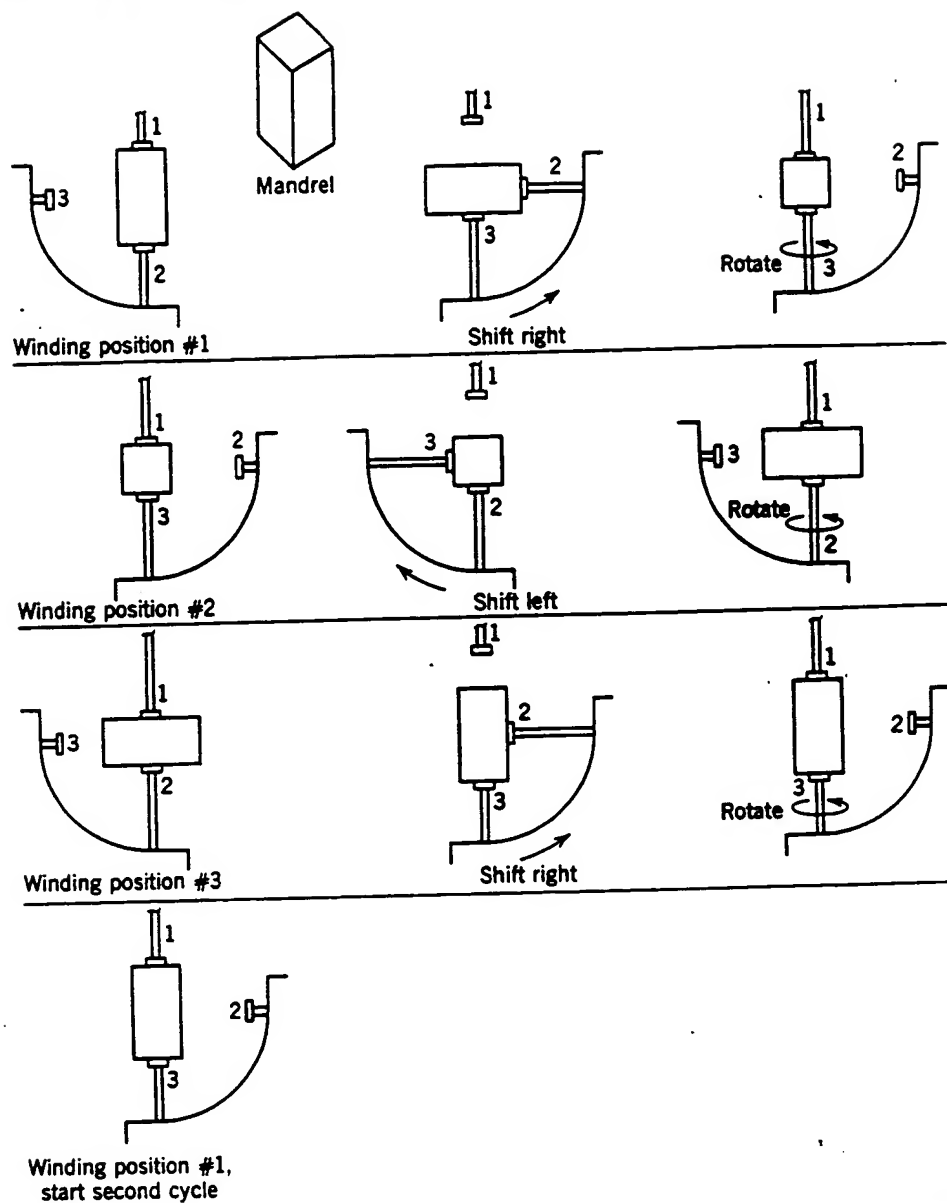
Box winding machine: position changes of clamp tooling to wind boxes. (Courtesy of Ferro Corp., Goldsworthy Engineering Division.)
